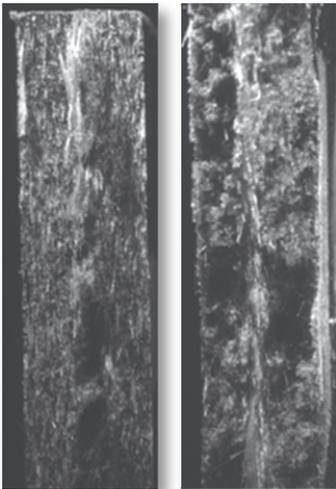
Fracture surfaces with core-shell structure visible.
